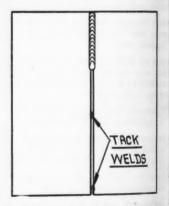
Welding speed that is too high cause plates to pull apart.
